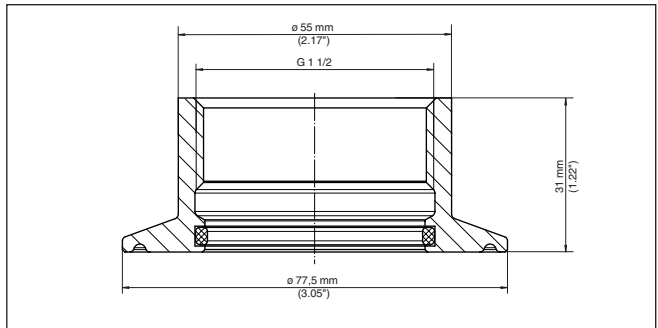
Dimensions of threaded adapter G1½ (DIN 3852-X) on Clamp 2½" (DIN 32676, ISO 2852) PN 16
